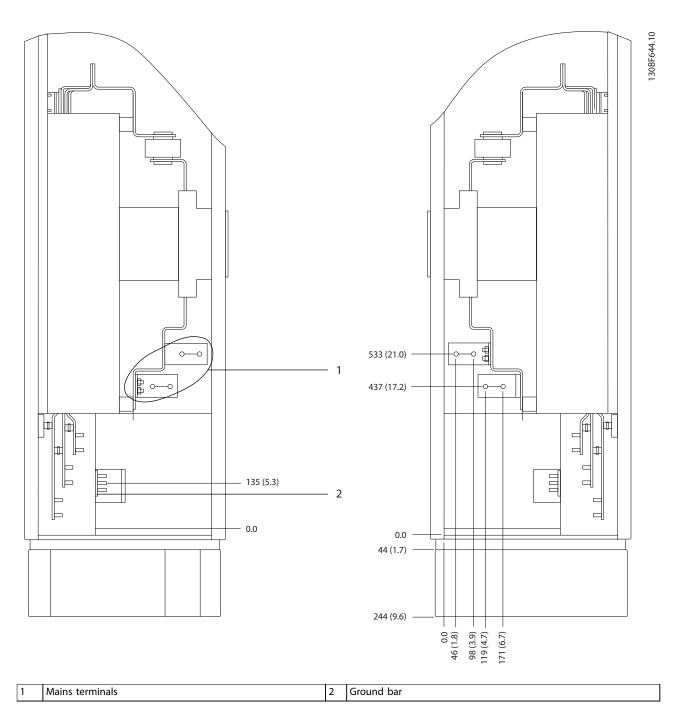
Terminal Dimensions for F3-F4 Options Cabinet with Circuit Breaker/Molded Case Switch (380-480/500 V Models: P500-P630; 525-690 V Models: P800), Side View
